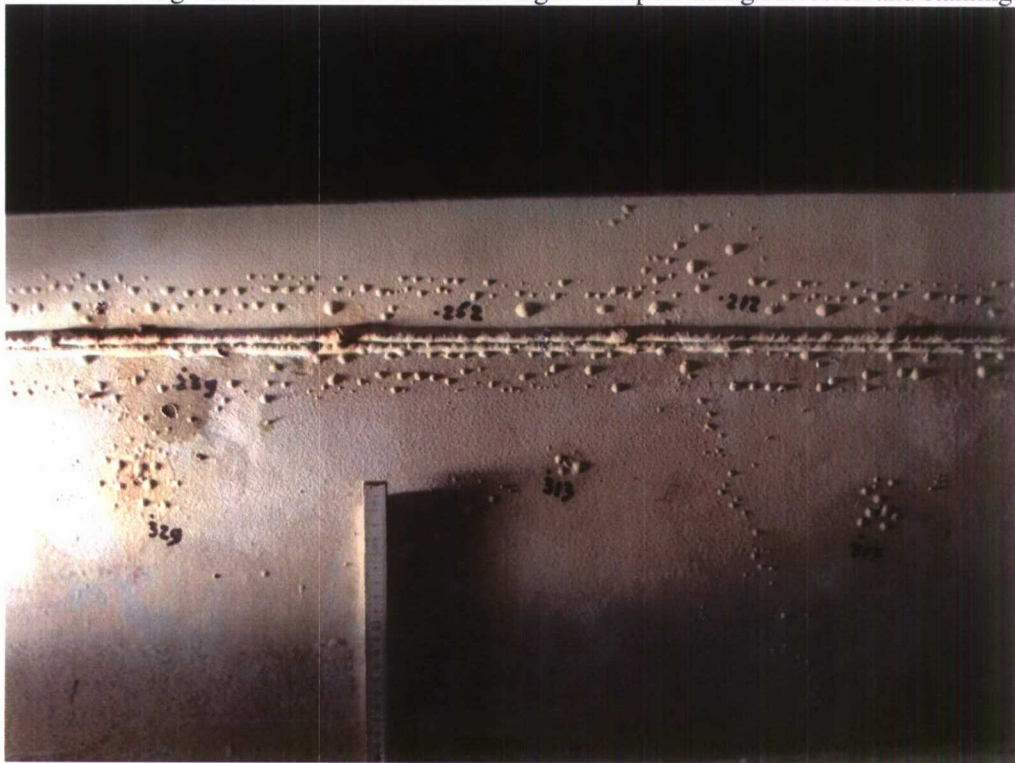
Hr.Ms. "De Ruyter" (LCF 3). Water ballast tank 5 (08.11.2006).
